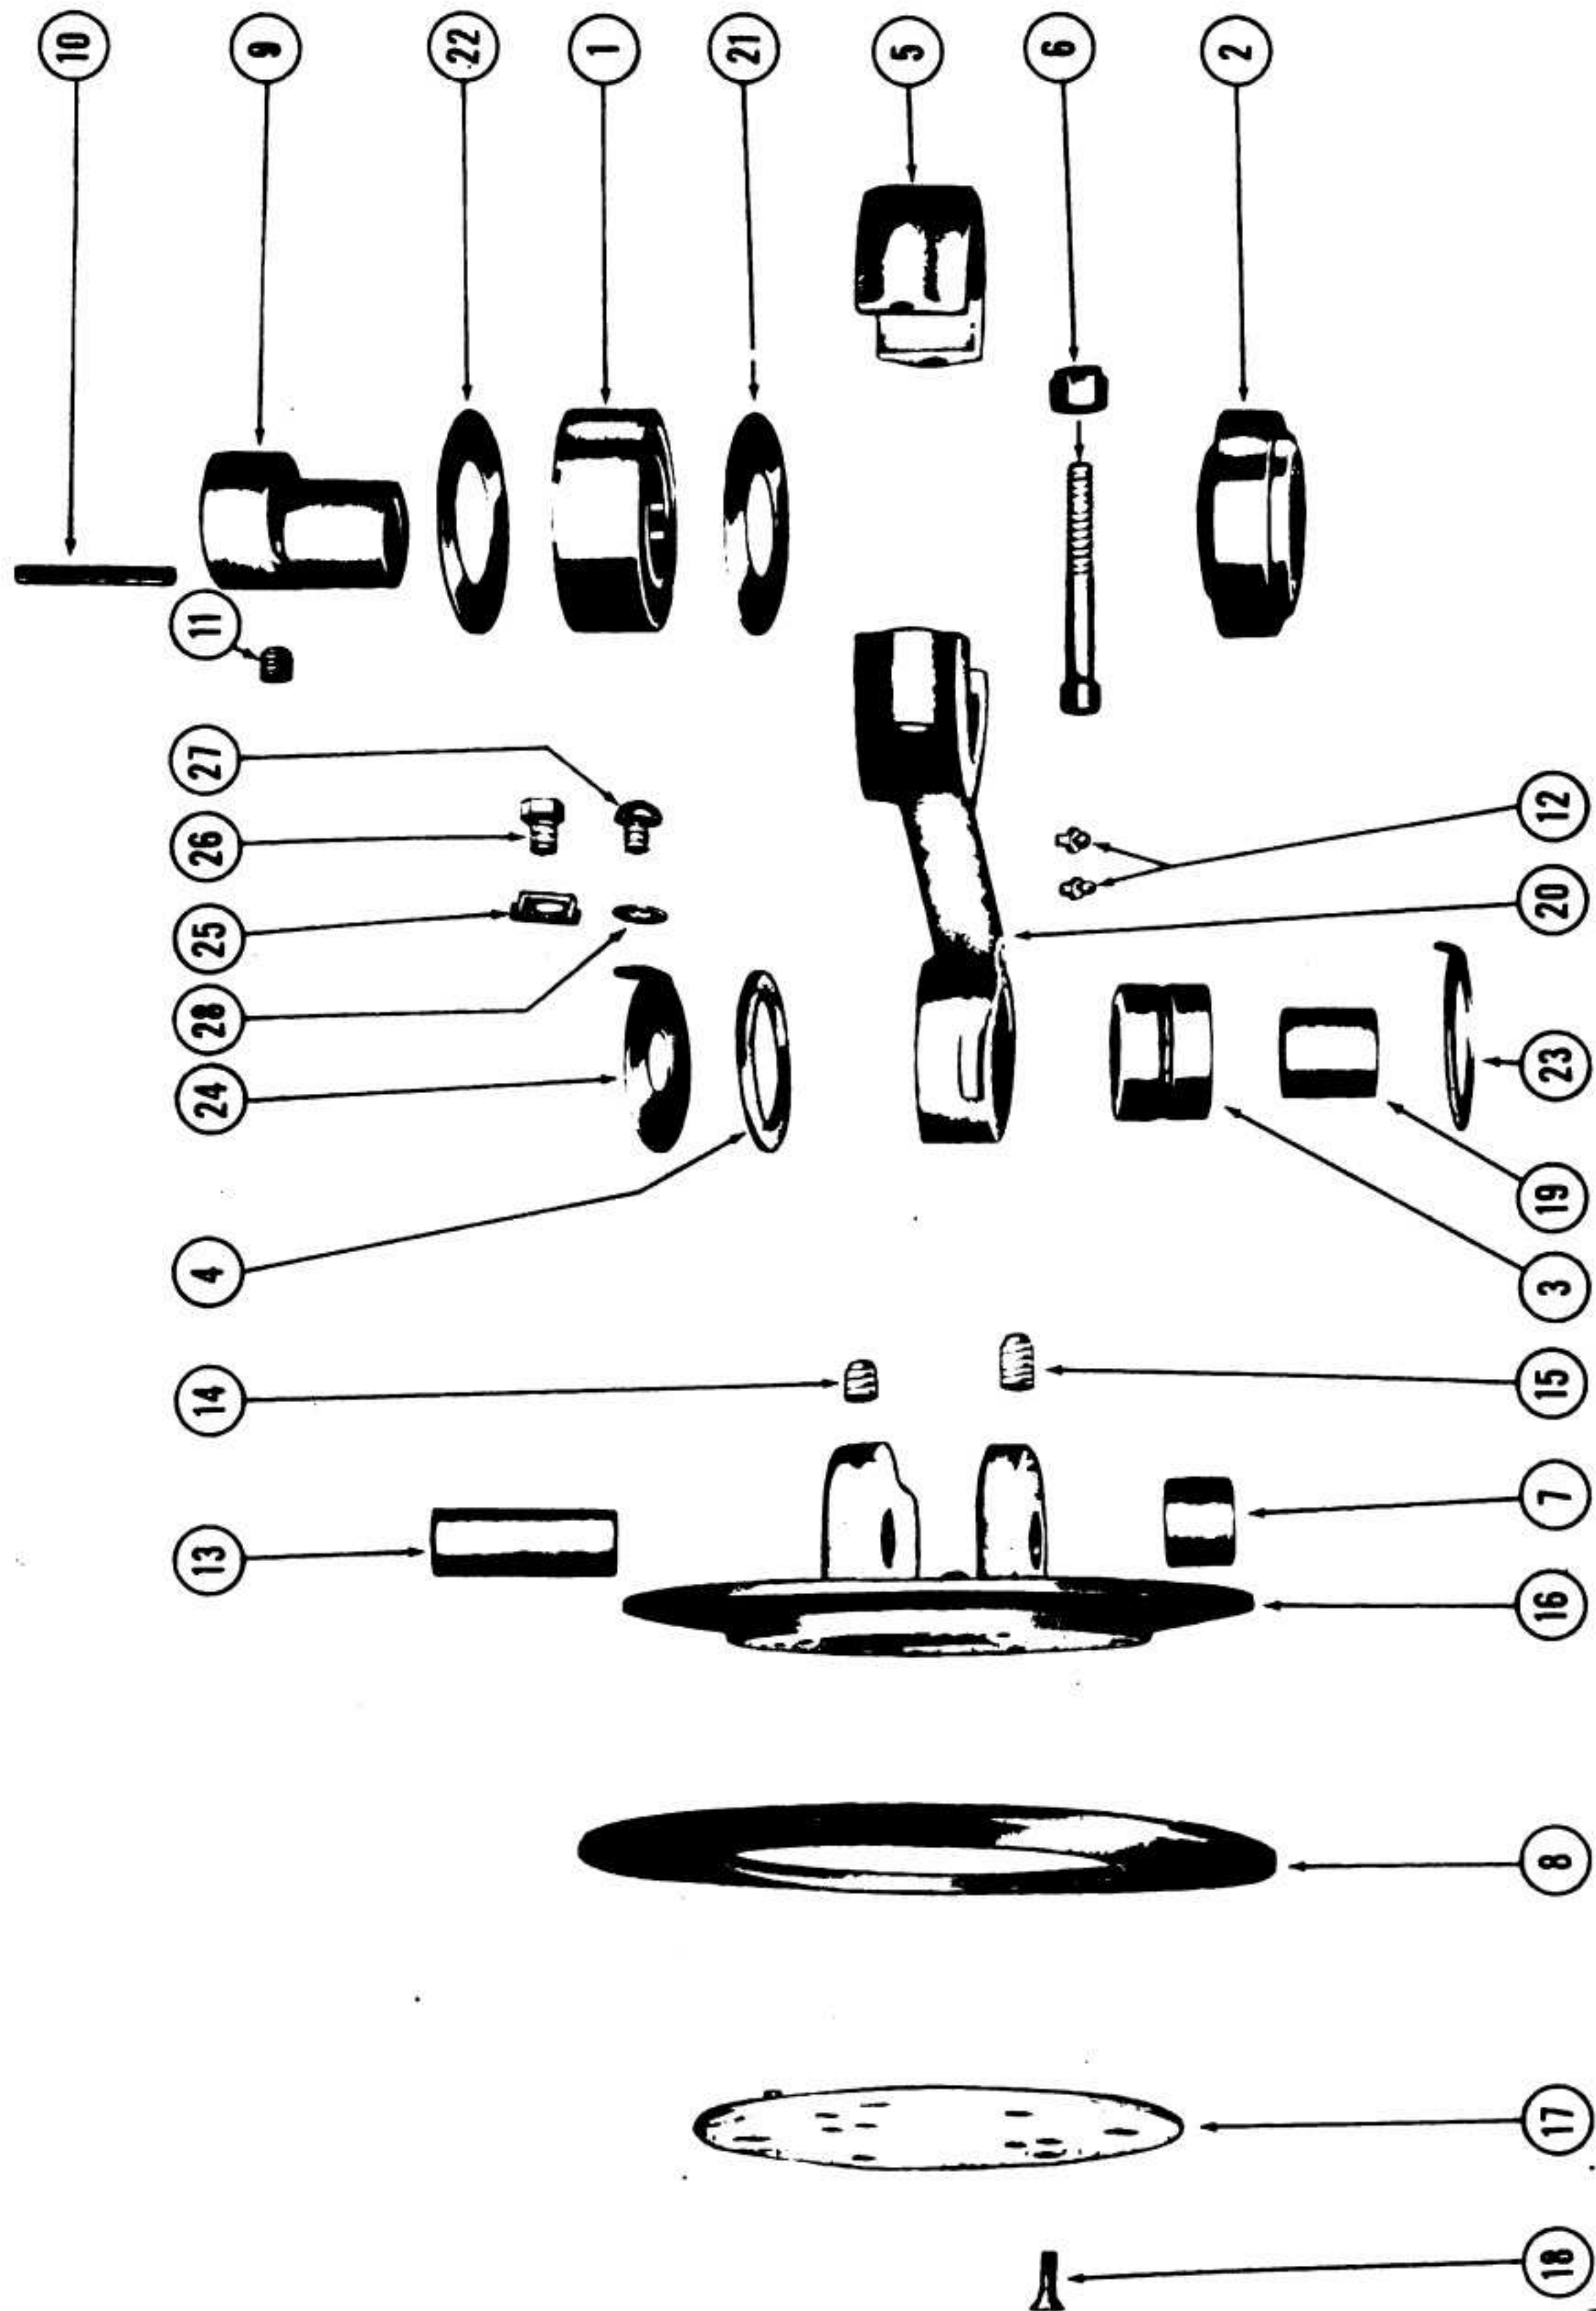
Compressor Connecting Rod, Bearings, Pistons, and Diaphragms
